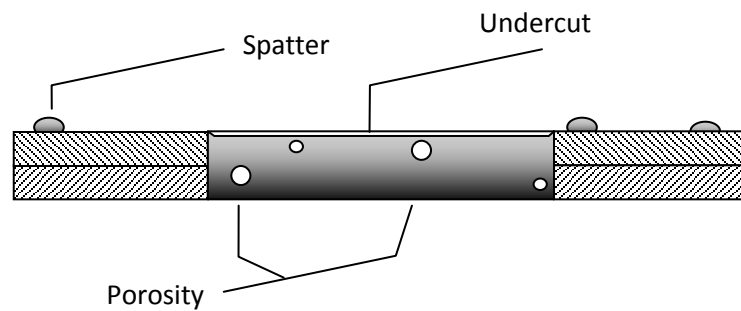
Schematic: longitudinal weld section showing porosity, undercut and spatter
